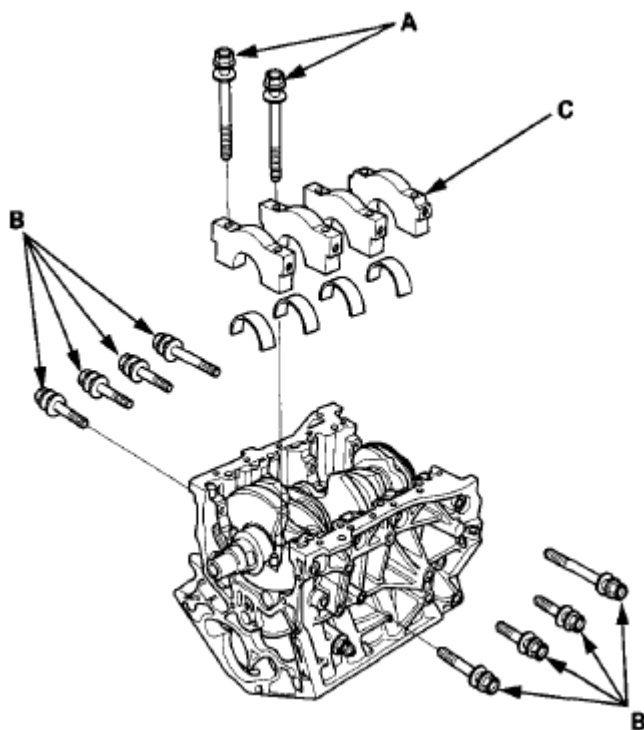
Removing Bearing Cap Bolts And Bearing Cap Side Bolts
